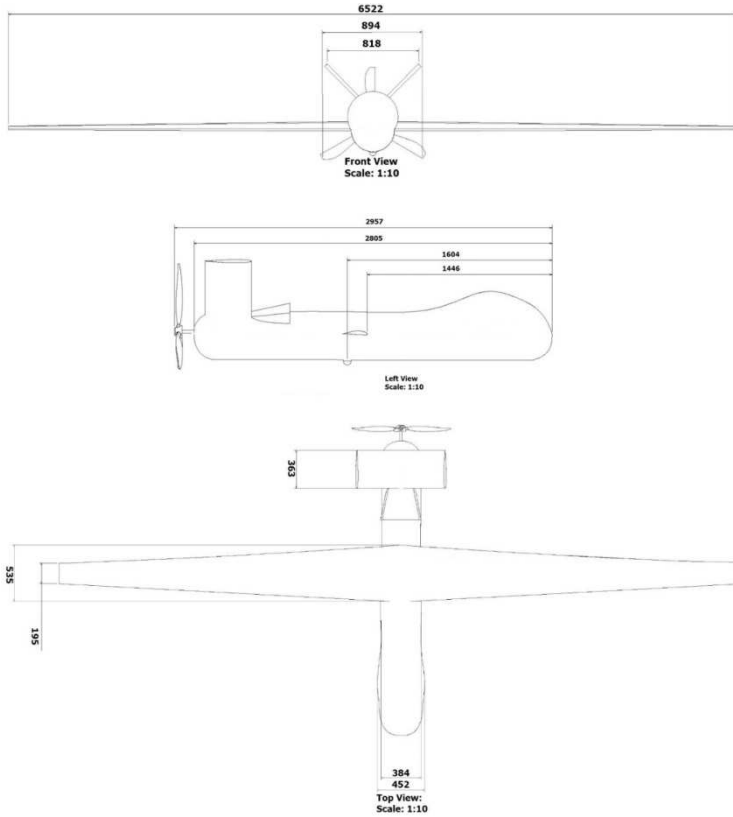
A 3 view drawing of the UAV design, showing relevant dimensions
